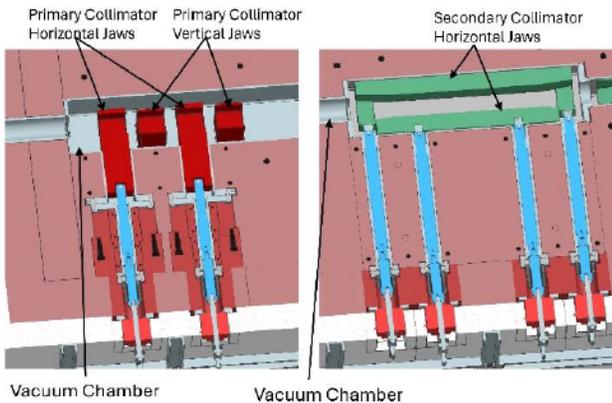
Horizontal sectional view of primary and secondary collimator jaws bisected in beam plane.
